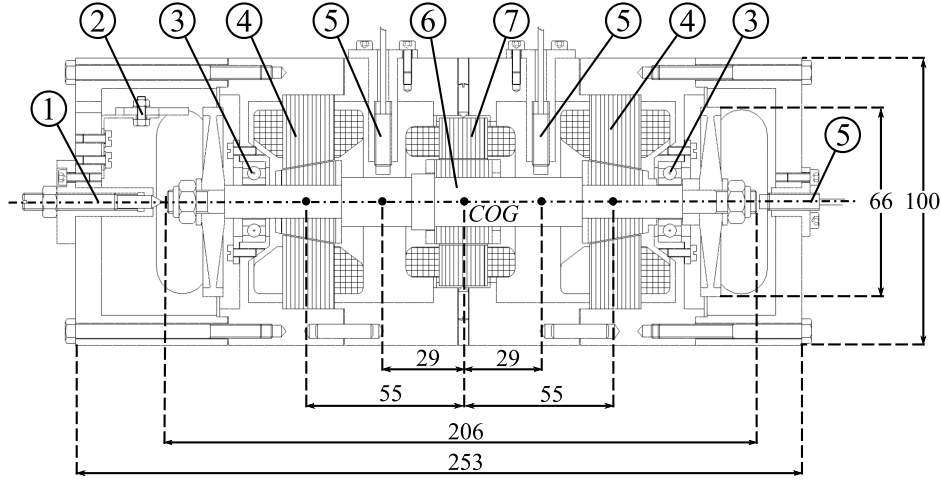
Section view of the machine. 1) Centering tip. 2) Spin speed sensor. 3) Landing bearings. 4) Magnetic actuators. 5) Inductive displacement sensors. 6) Rotor. 7) Electric motor. The dimensions are in mm.
